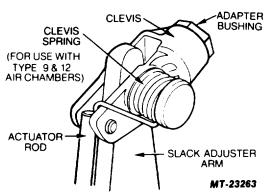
Front Axle Slack Adjuster Offset Clevis used with Type 9 and 12 Air Chambers
